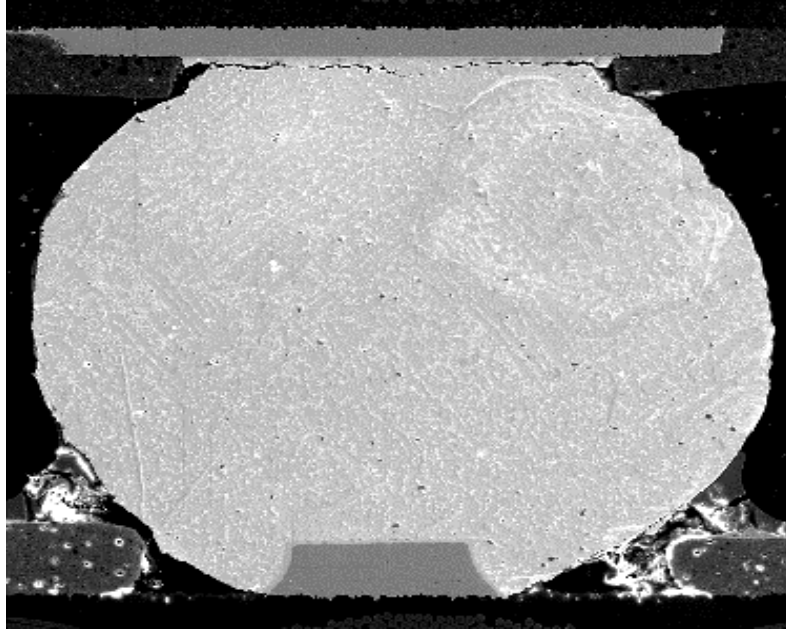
Typical X-Section of a Completely Cracked SnAgCu Solder Joint, 27 mm BGA after 1500 Cycles
